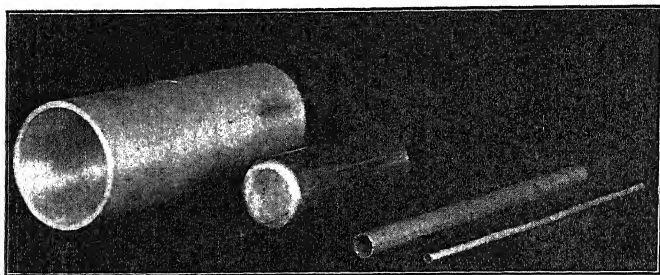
LARGE TUBE AT LEFT ELECTRICALLY WELDED. OTHER TUBES DRAWN AFTER CUPPING.
